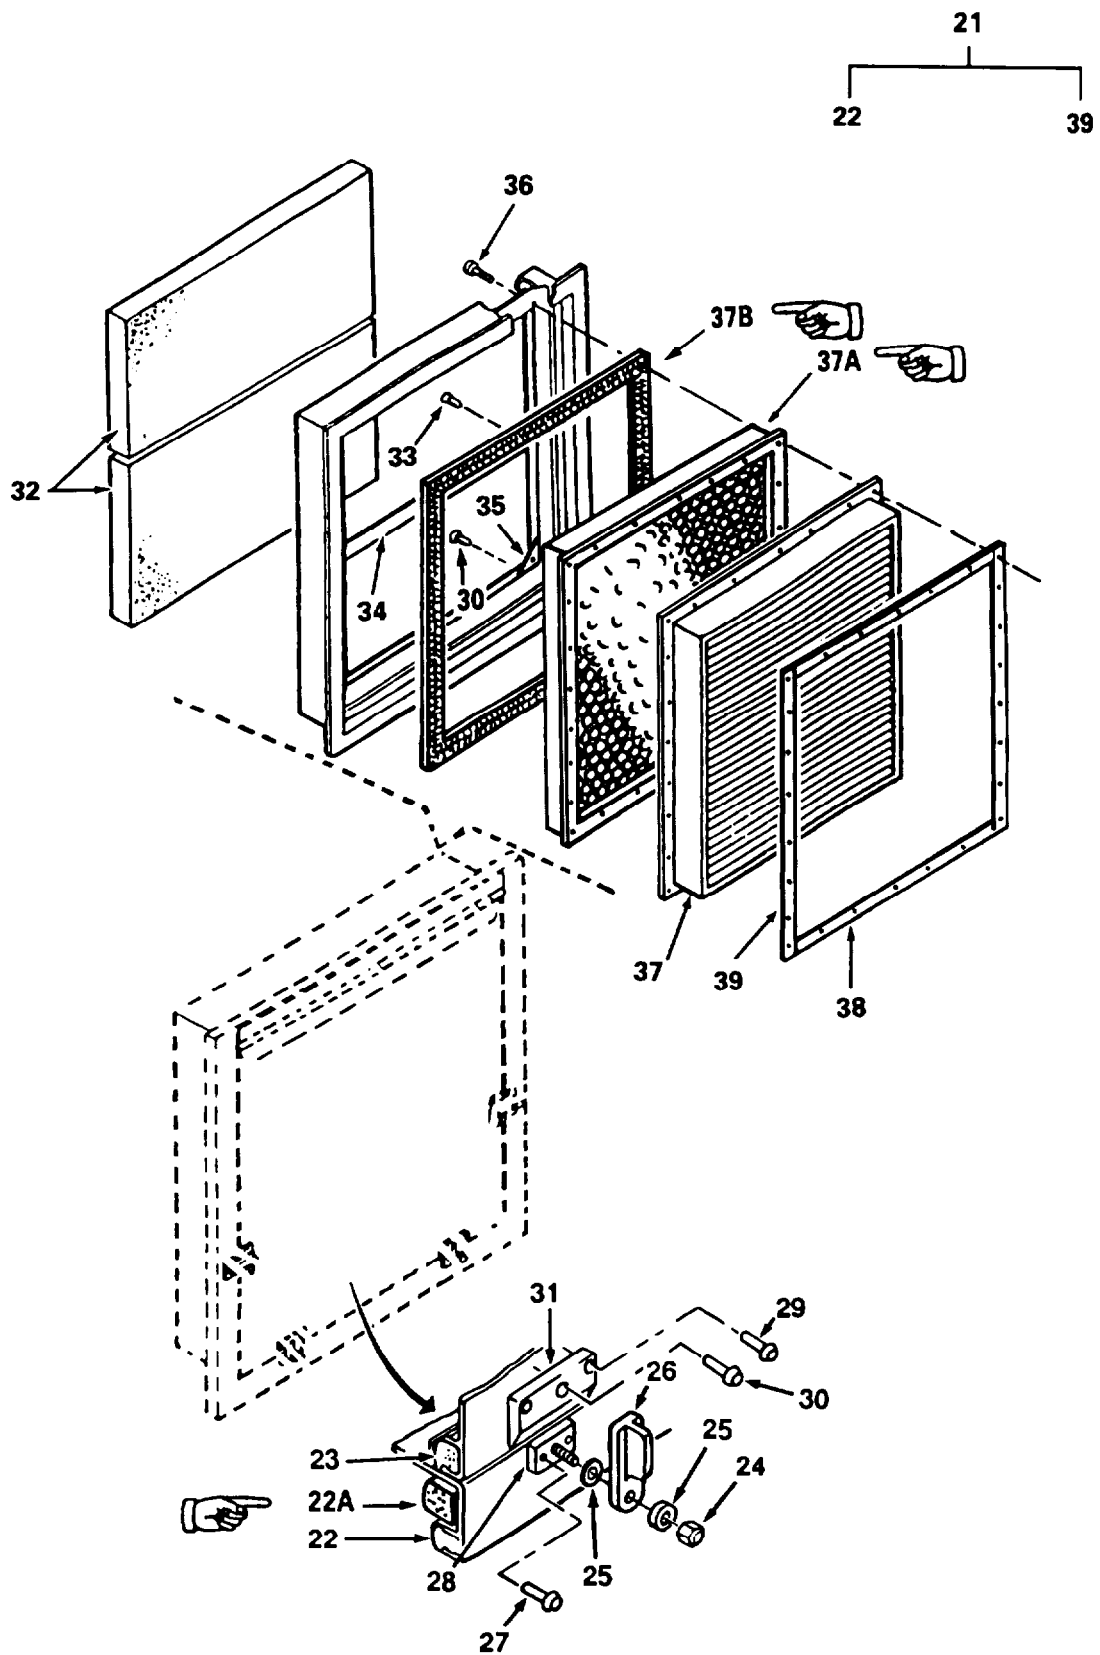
Door Assembly and Emergency Exit Panel (Sheet 2 of 2)
